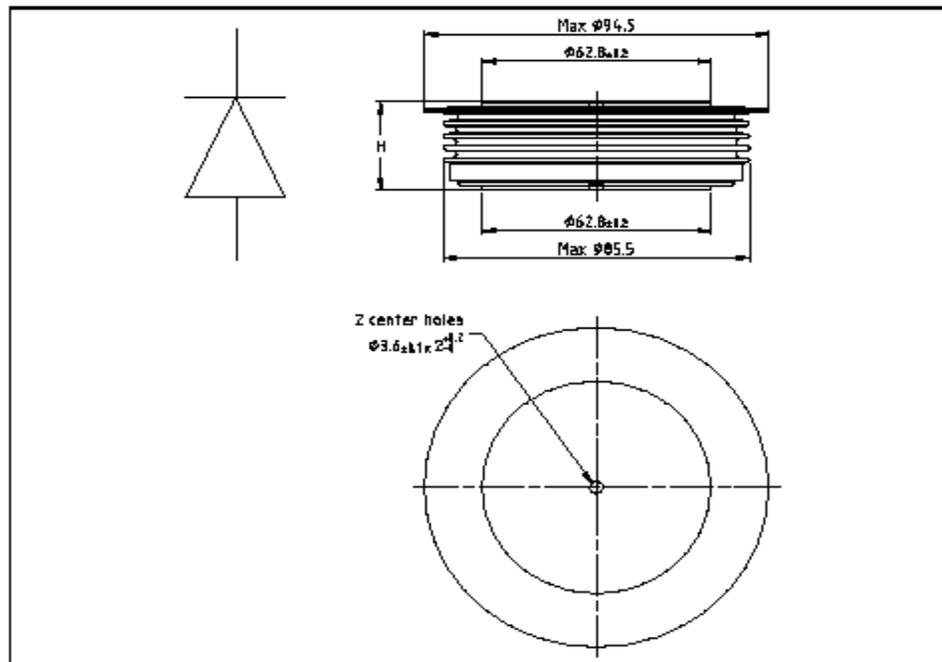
Outline drawing, all dimensions are in millimeters and represent nominal values unless stated otherwise
